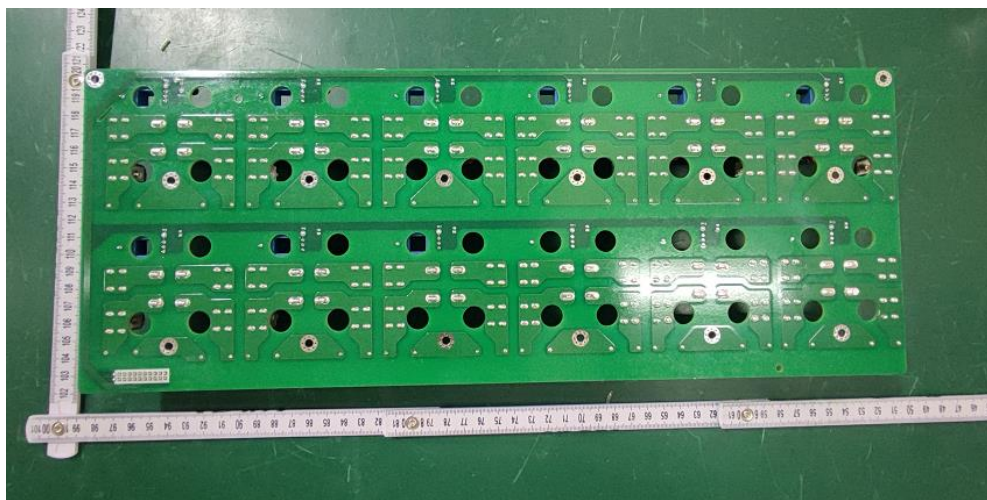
Back view of PV input board for C6-60K-T9-LV-40
